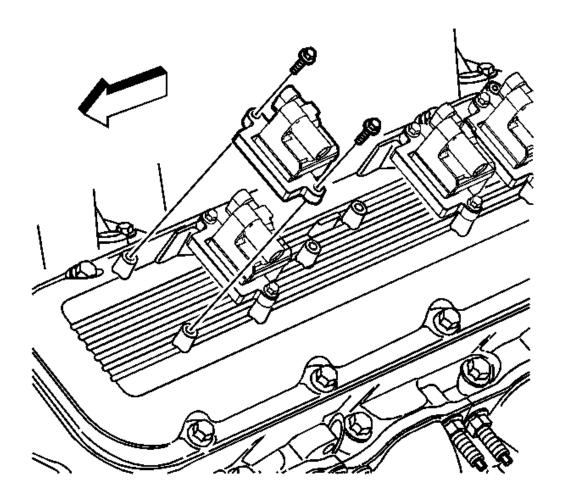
View Of Ignition Coils & Bolts Courtesy of GENERAL MOTORS CORP.
